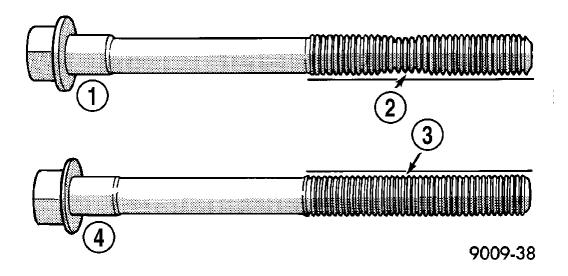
Checking Connecting Rod Bolts For Necking Courtesy of CHRYSLER LLC
